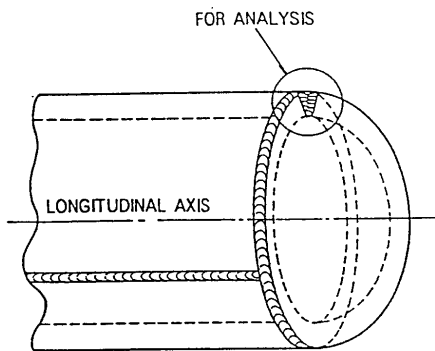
Welded cylinder-head connection of a pressure vessel.
